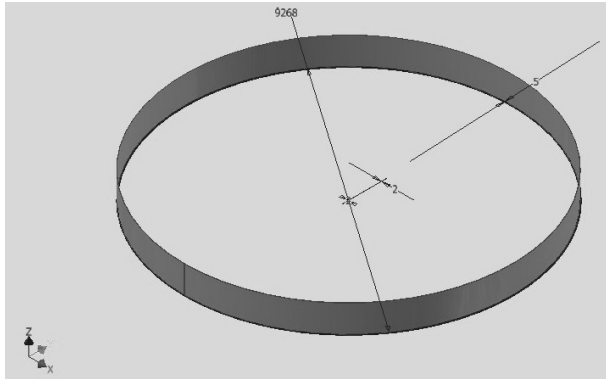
The shell's ring with visible groove for the weld [own elaboration]
